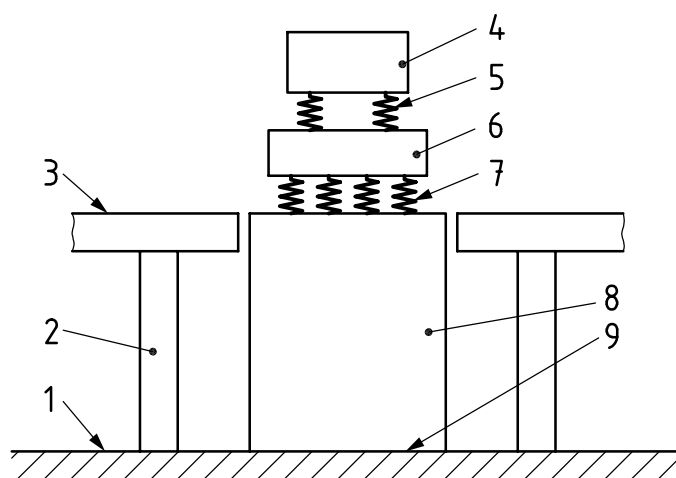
Assembly with flange housing and resilient mounting of the engine
